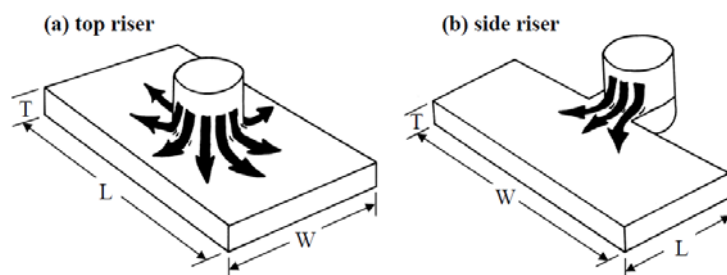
Dimensions for casting sections fed by (a) a top riser, and (b) a side riser (adapted from [15]).
